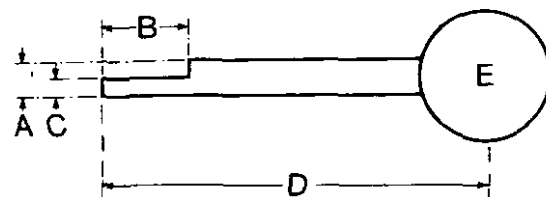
TOOL FOR LIFTING THE GEARBOX REAR UNIT
